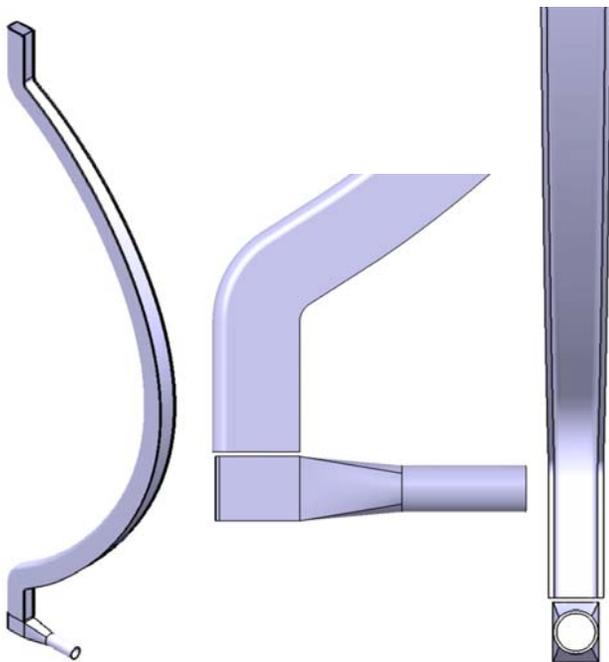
OB1 module in iso (left), side (middle) and back (right) view
